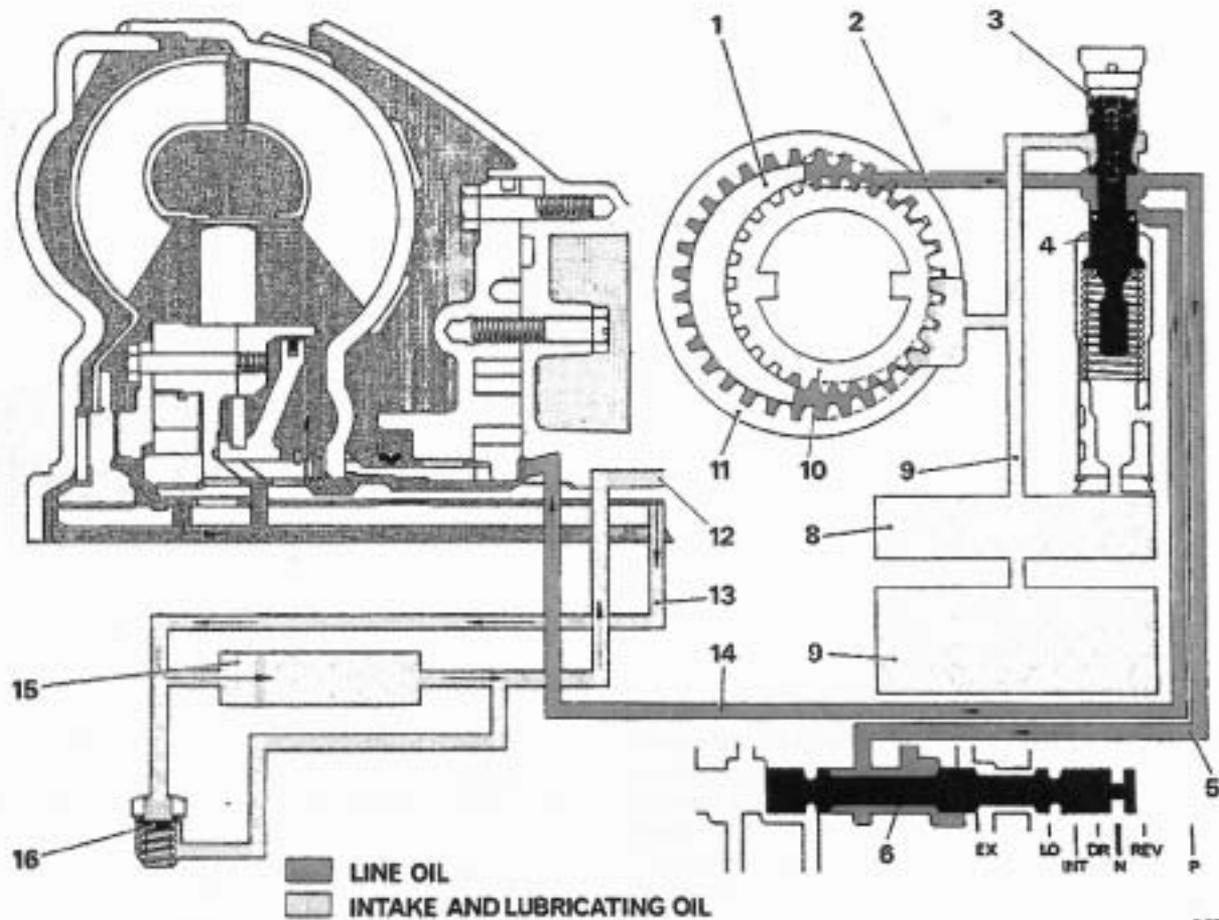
OIL PUMP AND PRESSURE REGULATING SYSTEM
